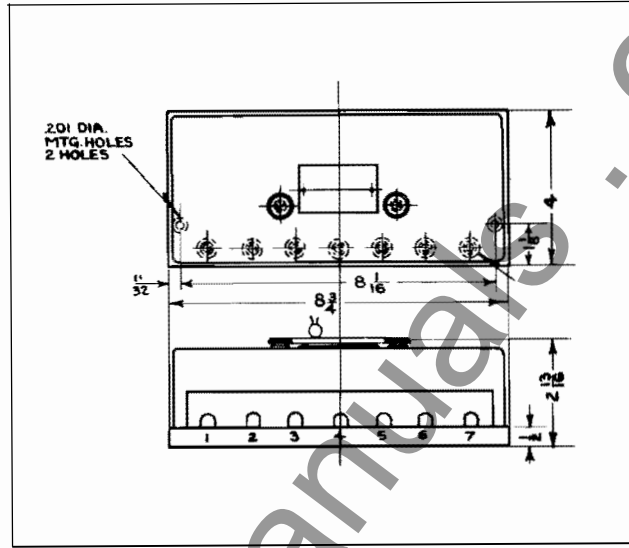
Outline Dimensions, Types K-1, -3, -4, -5, -7, -9 Phase Shifting Transformers.
